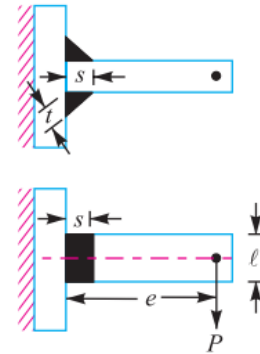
Eccentrically loaded welded joint.
